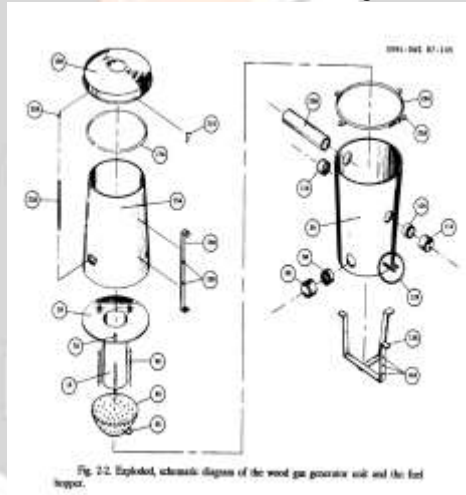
Exploded, schematic diagram of the wood gas generator unit and the fire hopper.
